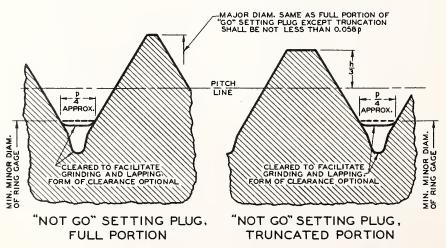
Thread form of "go" and "not go" thread setting plug gages.
